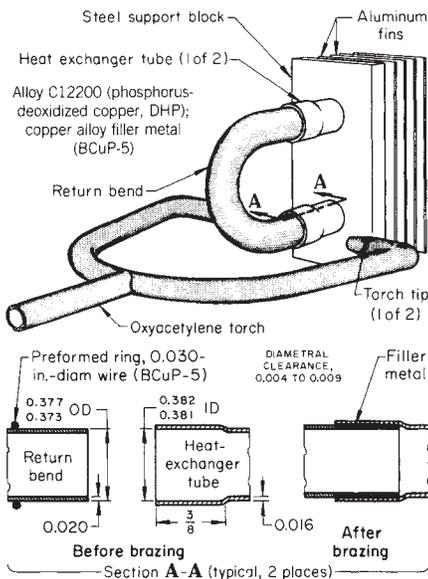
Return bend assembly of a heat exchanger. Includes a dual-tip torch used for rapid heating of the self-fluxing filler metal. Dimensions in inches
